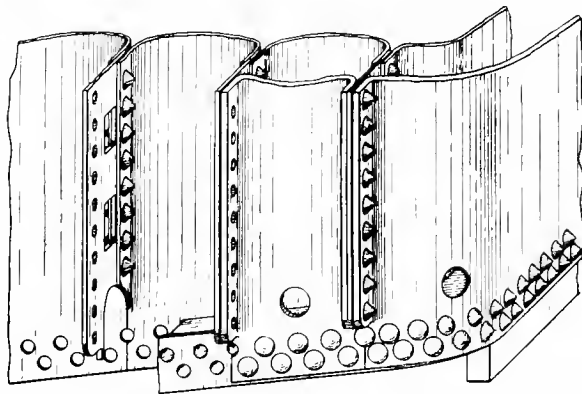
Details of butt-welded joint at mud-ring.
